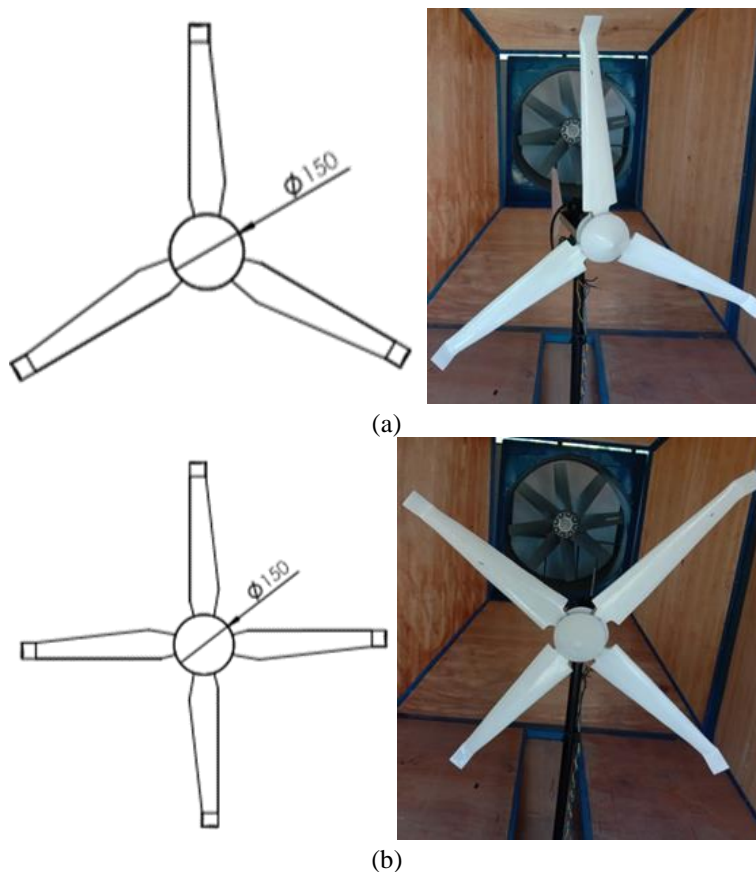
HAWT using wingle blades configuration of (a) three wingle blades and (b) four wingle blades.
